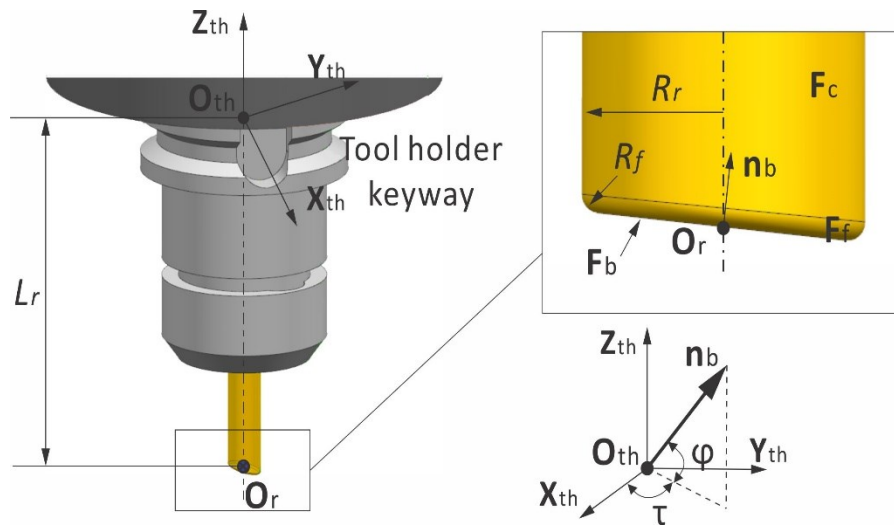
Illustration of an end measuring rod and the tool holder coordinate system
